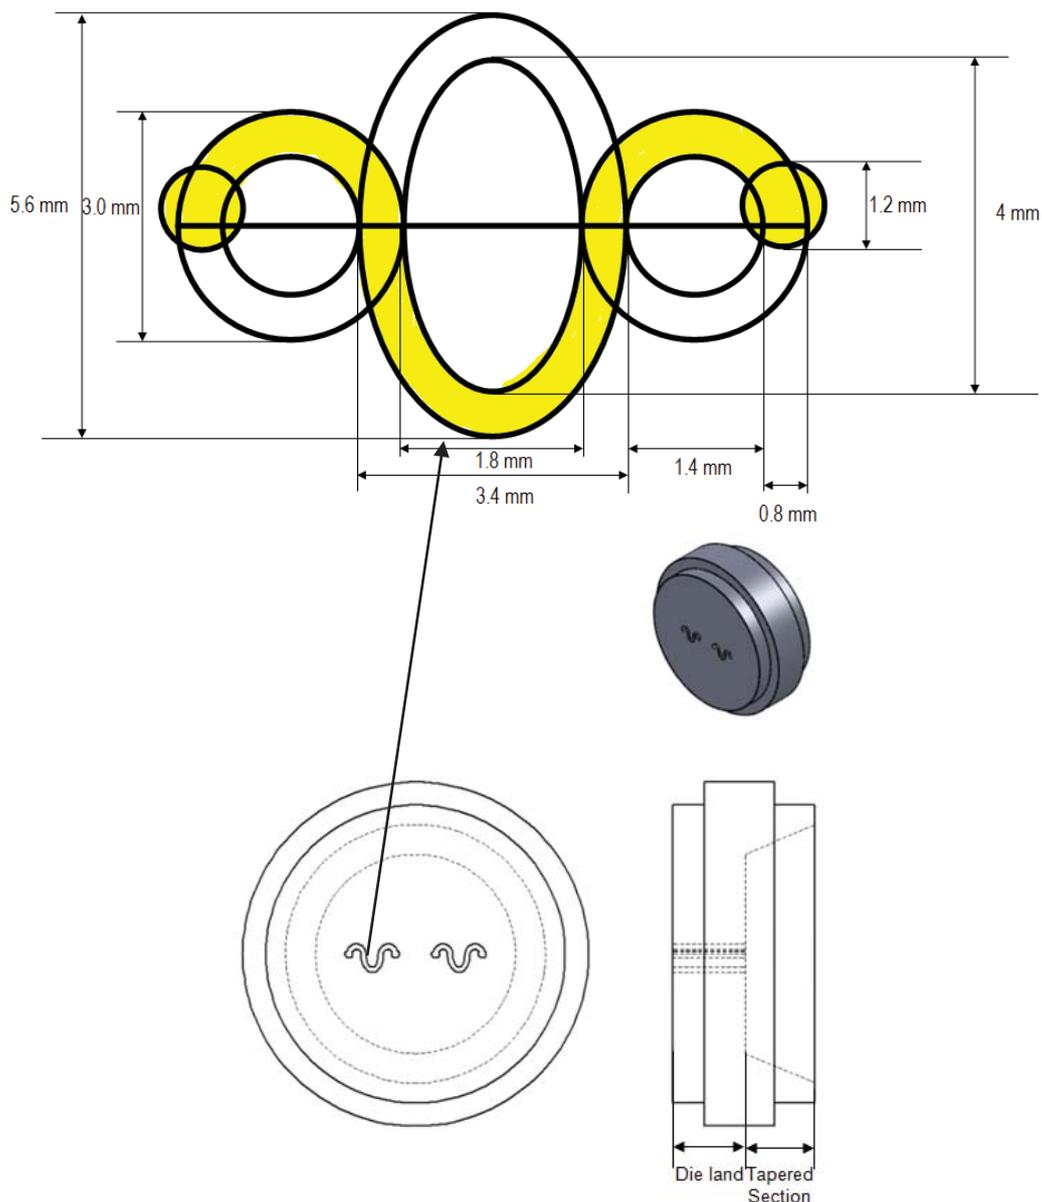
Wave shaped 3G snack die design and opening dimensions
